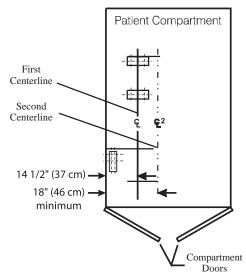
Example of Two Centerlines Drawn at the Minimum Distance from Wall
